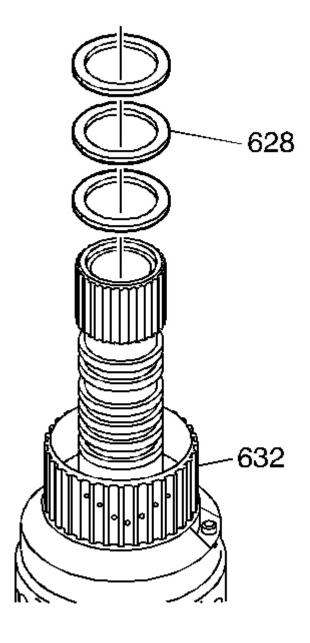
Locating Second & Third Seal Rings Courtesy of GENERAL MOTORS CORP.
